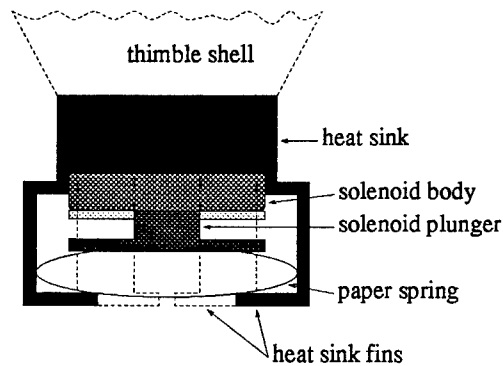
Heat Sink and Spring Return Mechanism Added to Solenoid
